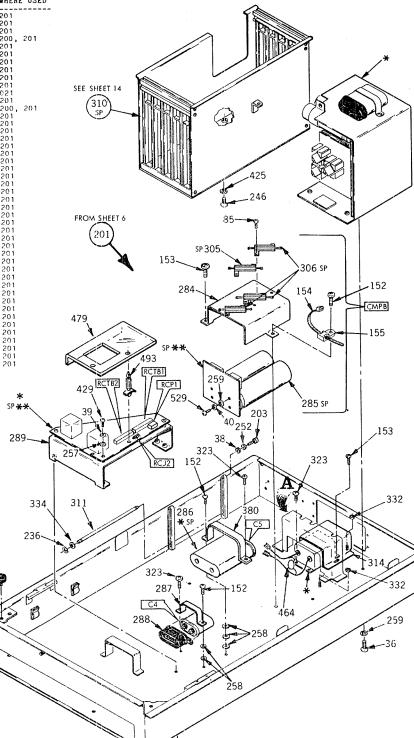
BASE PAN ASSEMBLY (SHEET 2 of 2)
